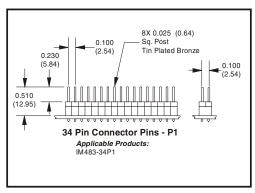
IM483-34P1 Connector P1 Mechanical Drawing
